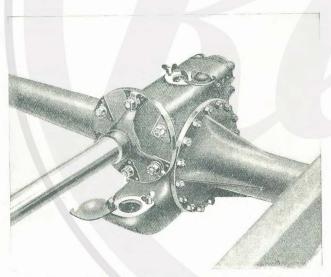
THE BACK AXLE CENTRE OF THE 14 H.P. "STANDARD." Showing the inspection hole above the worm casing, and the oil filling and level testing extension below.
